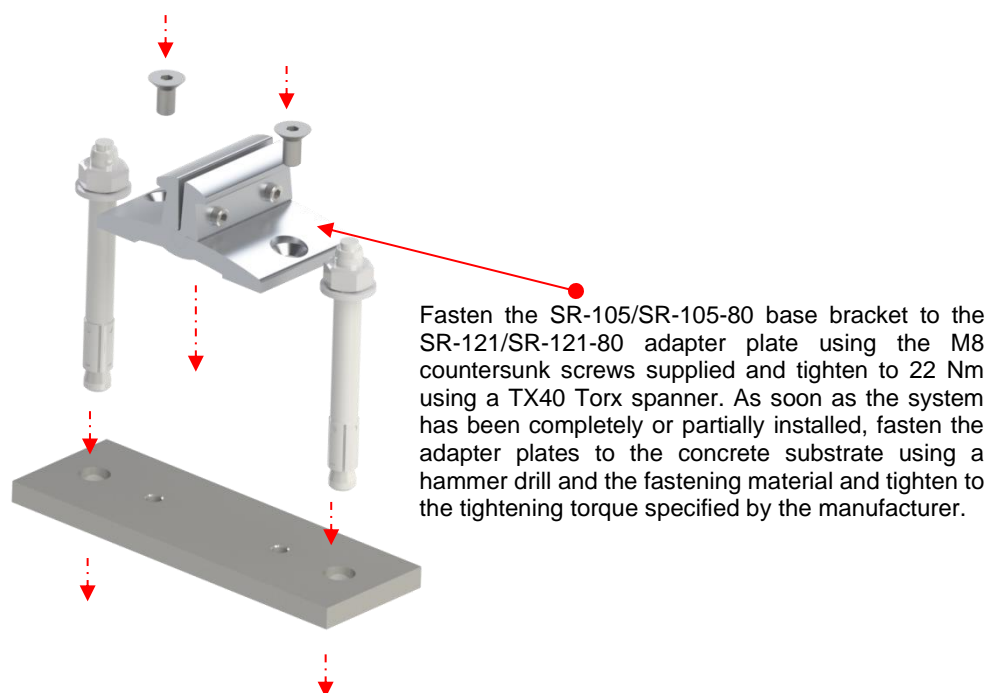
Mounting the SR-105 base console on the SR-121 adapter plate /SR-121-80
